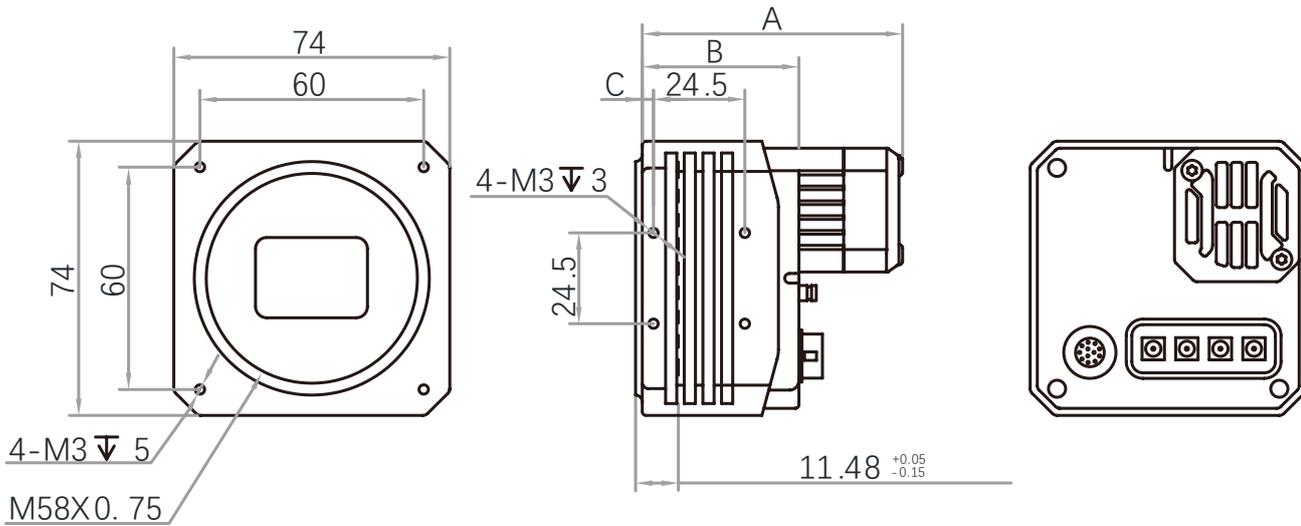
74 * 74 * A mm mechanical dimensions of the CoaXPress camera with M58, which adopts M3 specification screws.
